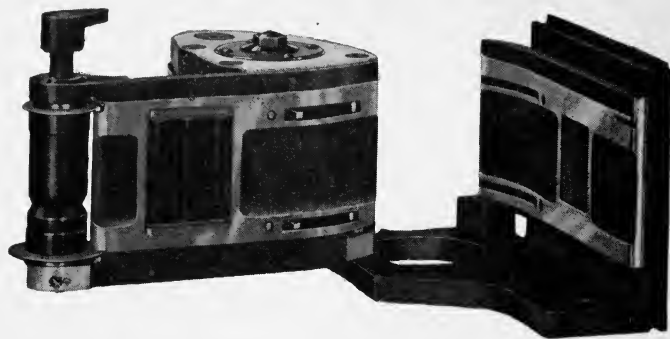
Intermittent movement, pilot pin, and gate assembly.
